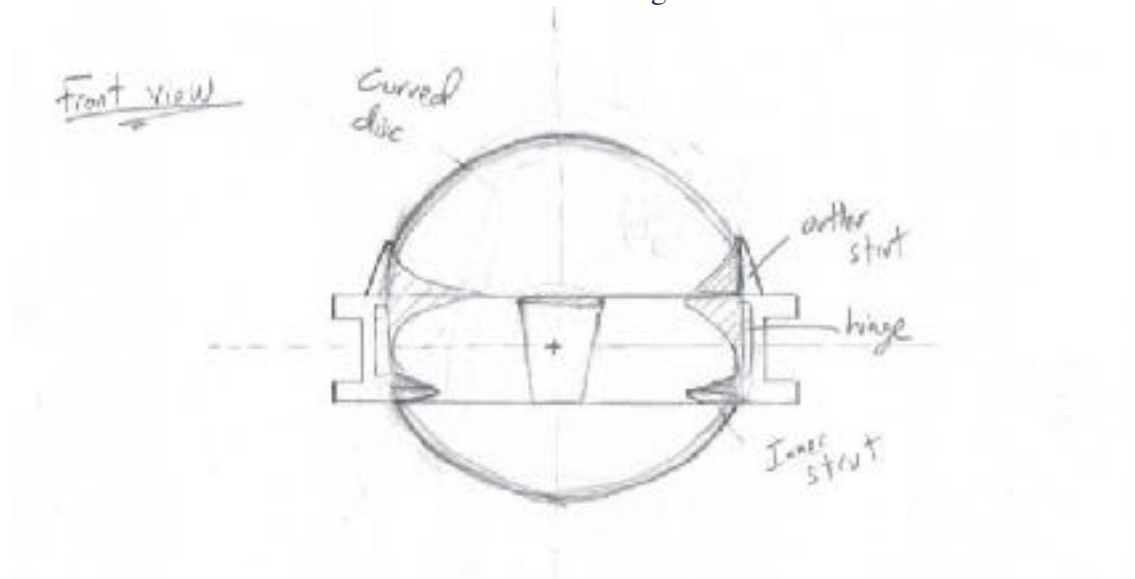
SKETCH OF FRONT VIEW OF TILTING DISC VALVE
